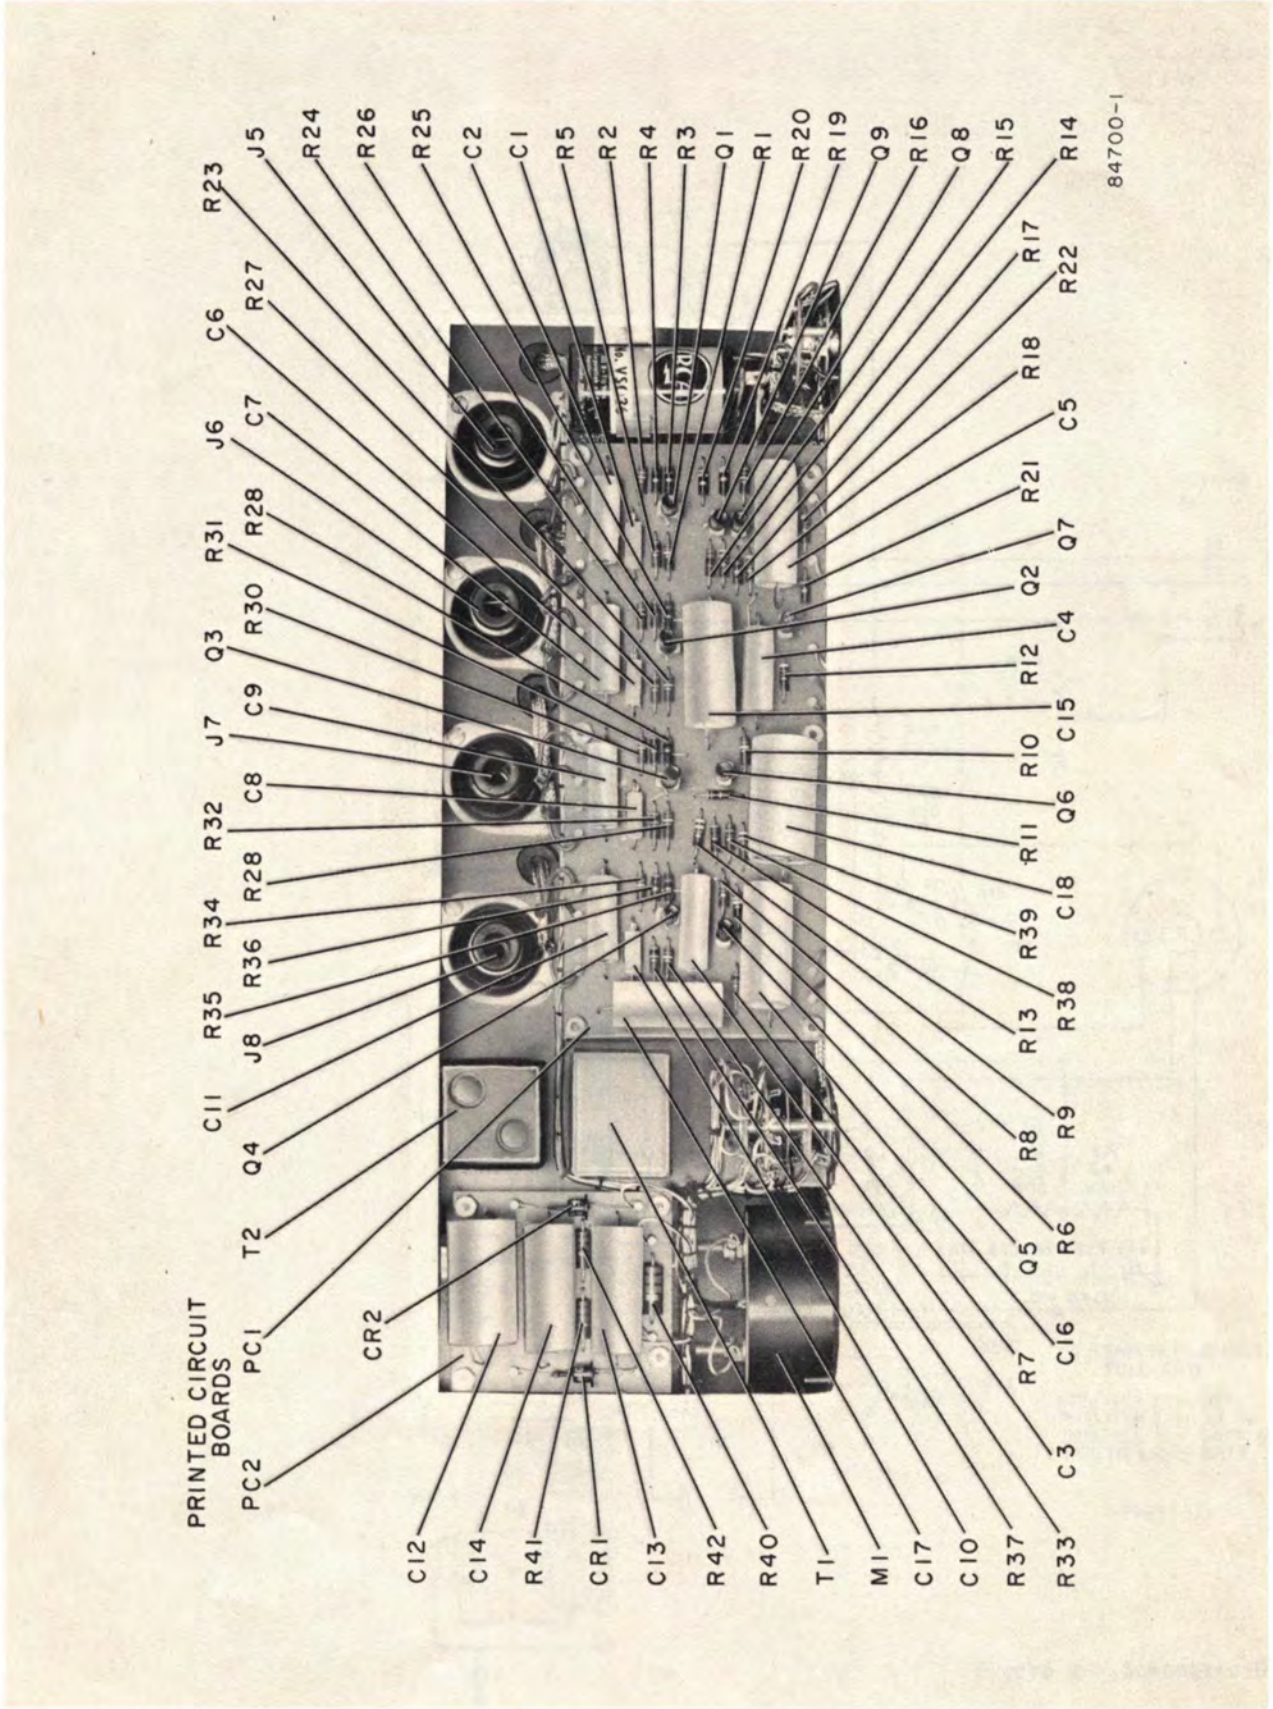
Amplifier With Cover Removed Showing Printed Circuit Boards
